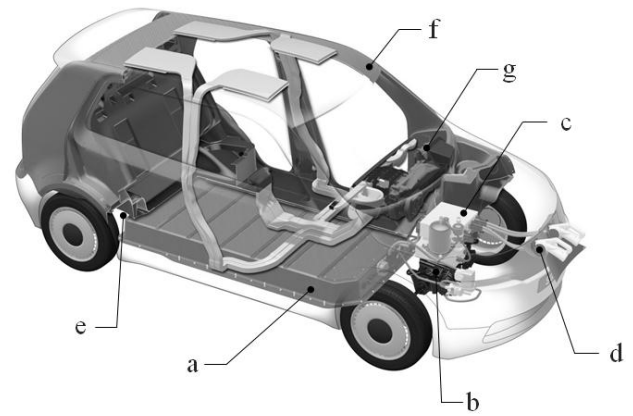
Main components of EVA: a) battery, b) electric motor, c) HV components, d) charging sockets, e) wireless charging system, f) composite structure, g) A/C system
